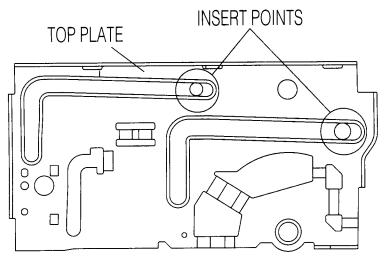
ASSEMBLY OF THE F/L ASS'Y
